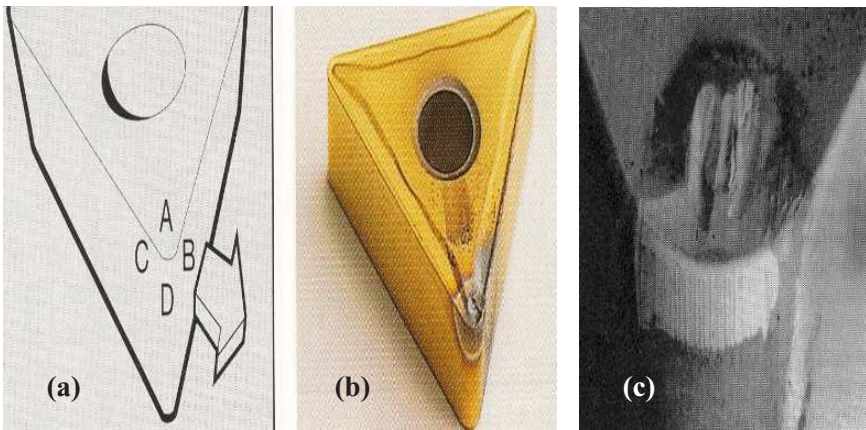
(a) Areas of wear on the cutting tool insert shown in Figure 5.1; (b) physical cutting tool insert showing worn edges described in (a); and (c) well developed flank and crater wear at the nose of the insert
